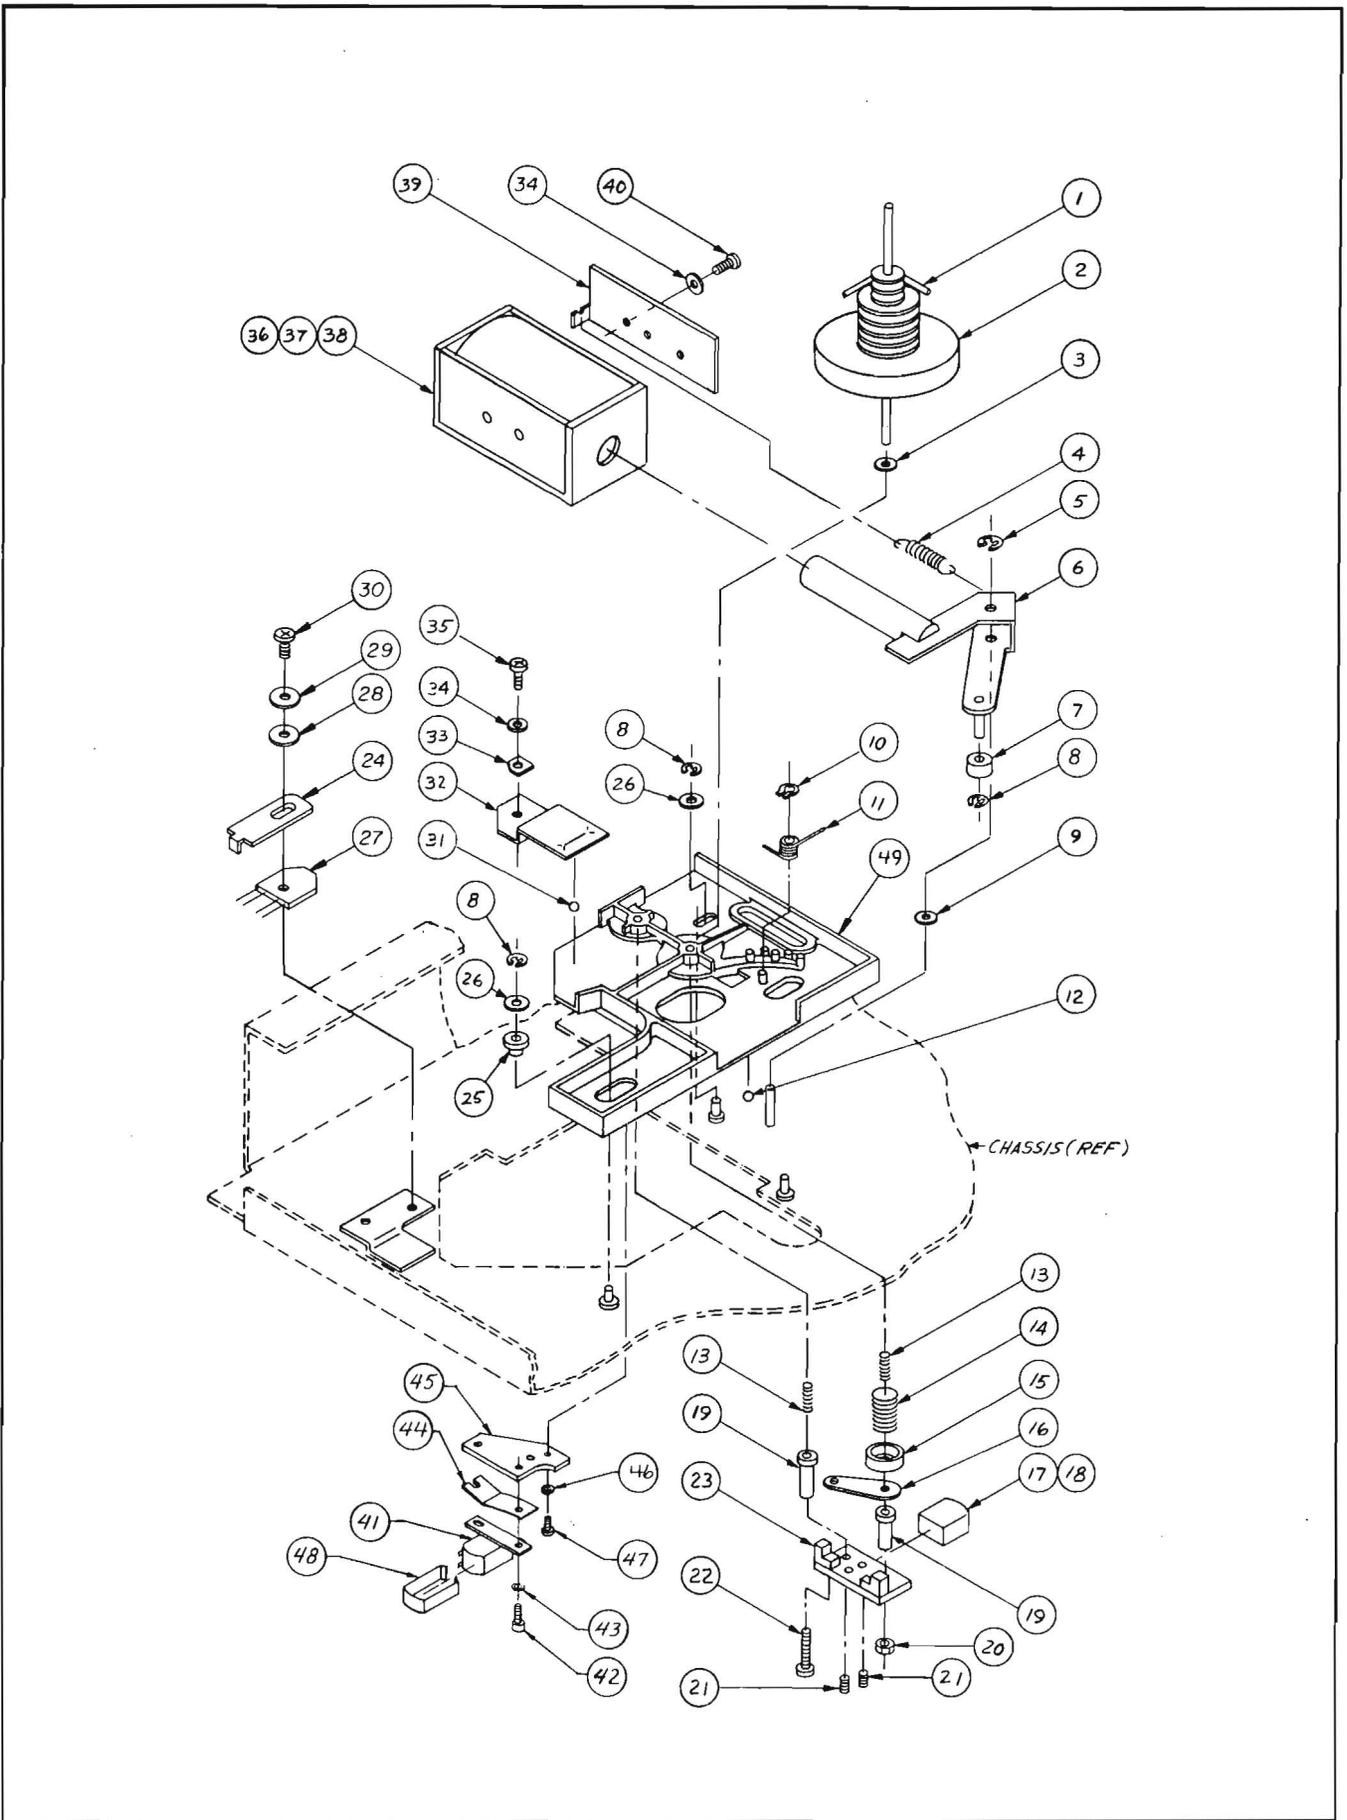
Cassette Head Plate Exploded View - Slave Position
